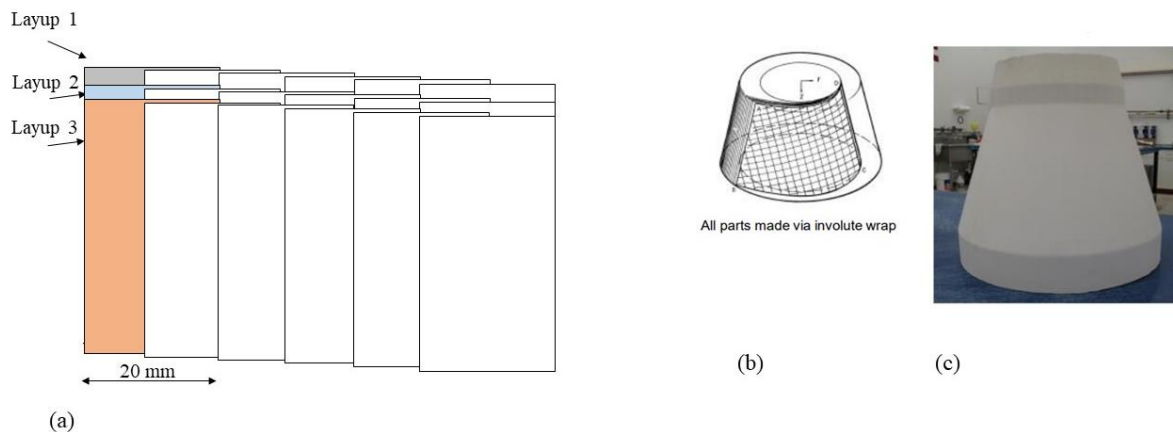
The involute layup used to fabricate (a) the 20 mm wide strips laid with a 10 mm overlap, (b) involute rapping used for conical designs, (c) a demonstrator manufactured using involute layup [155].
